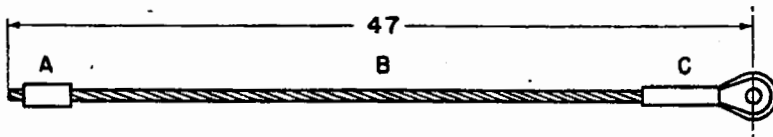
(Sheet 2 of 3 Sheets.) Flexible Cable Assemblies Reference Diagram.
